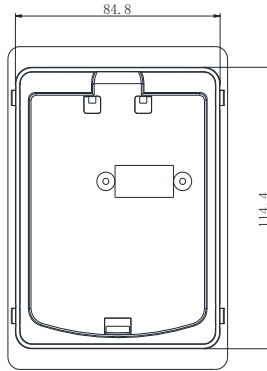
Mounting Base Opening Dimensions for MS20 Series External Keypads
